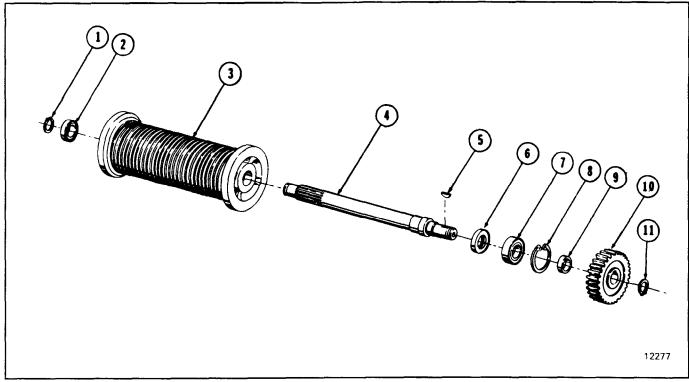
Drum	, Shaft,	Bearings	and	Gear	Parts.
